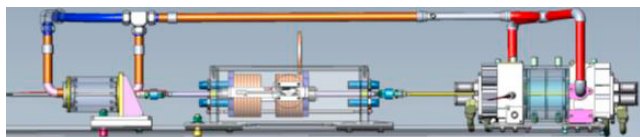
The first design of the Linear Joule Engine prototype [5]
